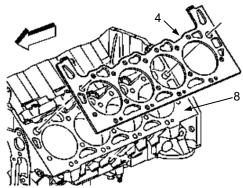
Cylinder Head Gasket (4) and Engine Block Cylinder Bank Deck (8)
